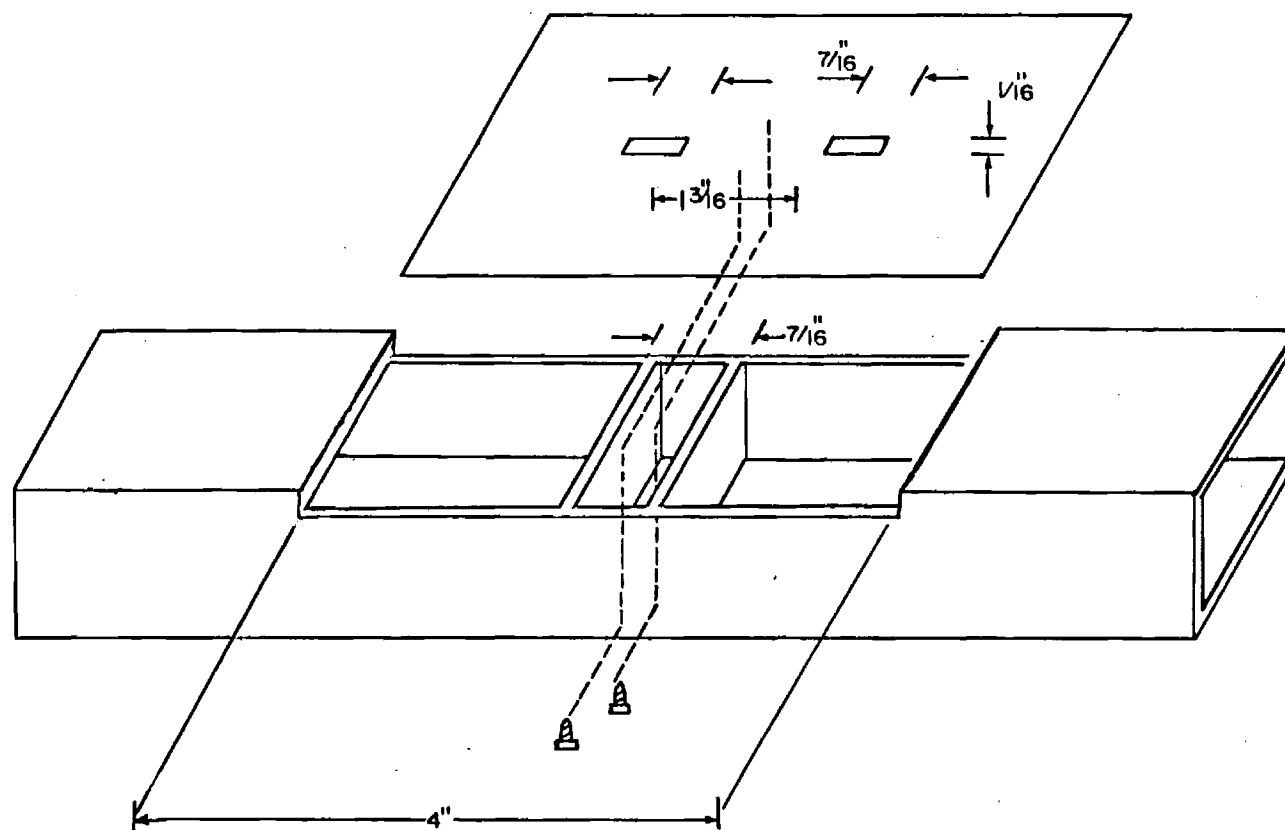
Exploded view of bottom plate of the cavity resonator.
